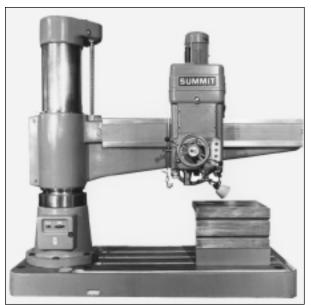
Radial drills are used to machine large castings, weldments or forgings. (Courtesy Summit Machine Tool Manufacturing Corp.)
